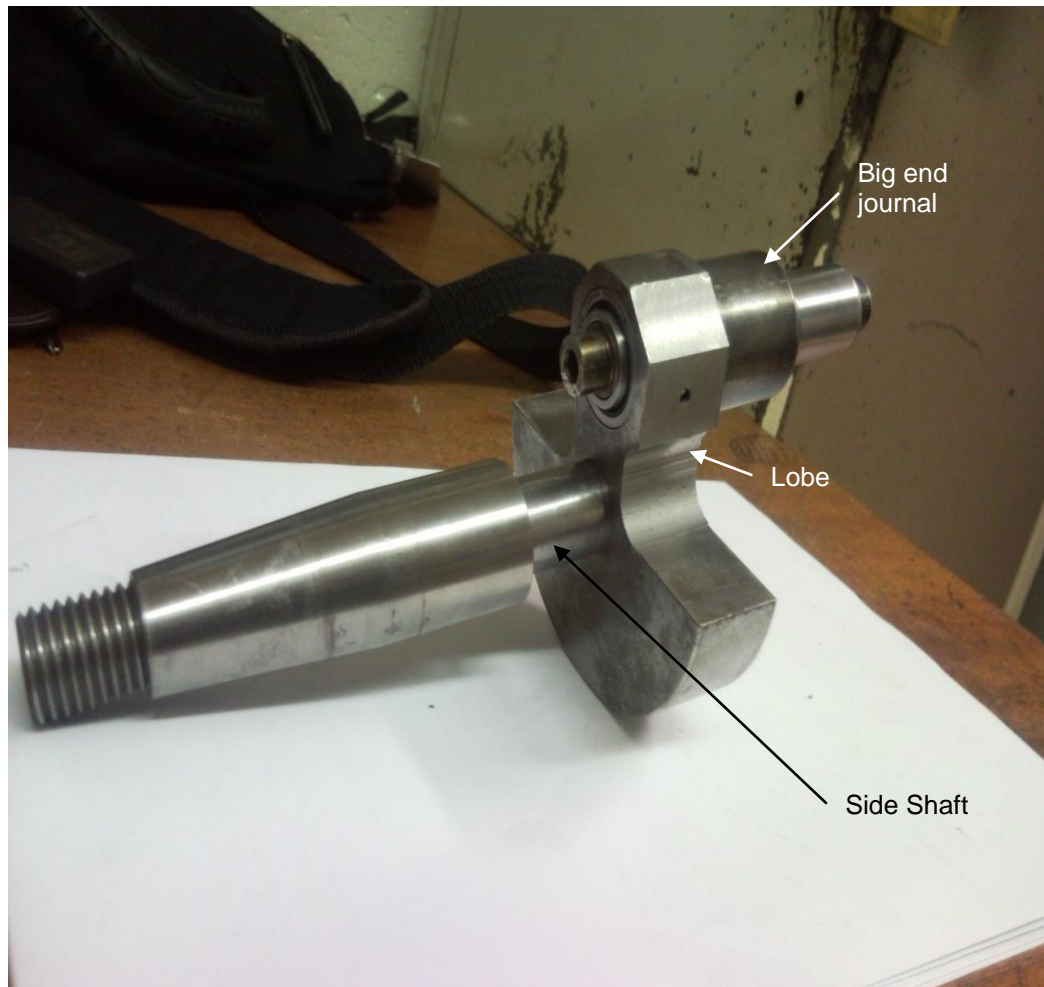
Counter mass lobe assembly (half crankshaft assembly)
